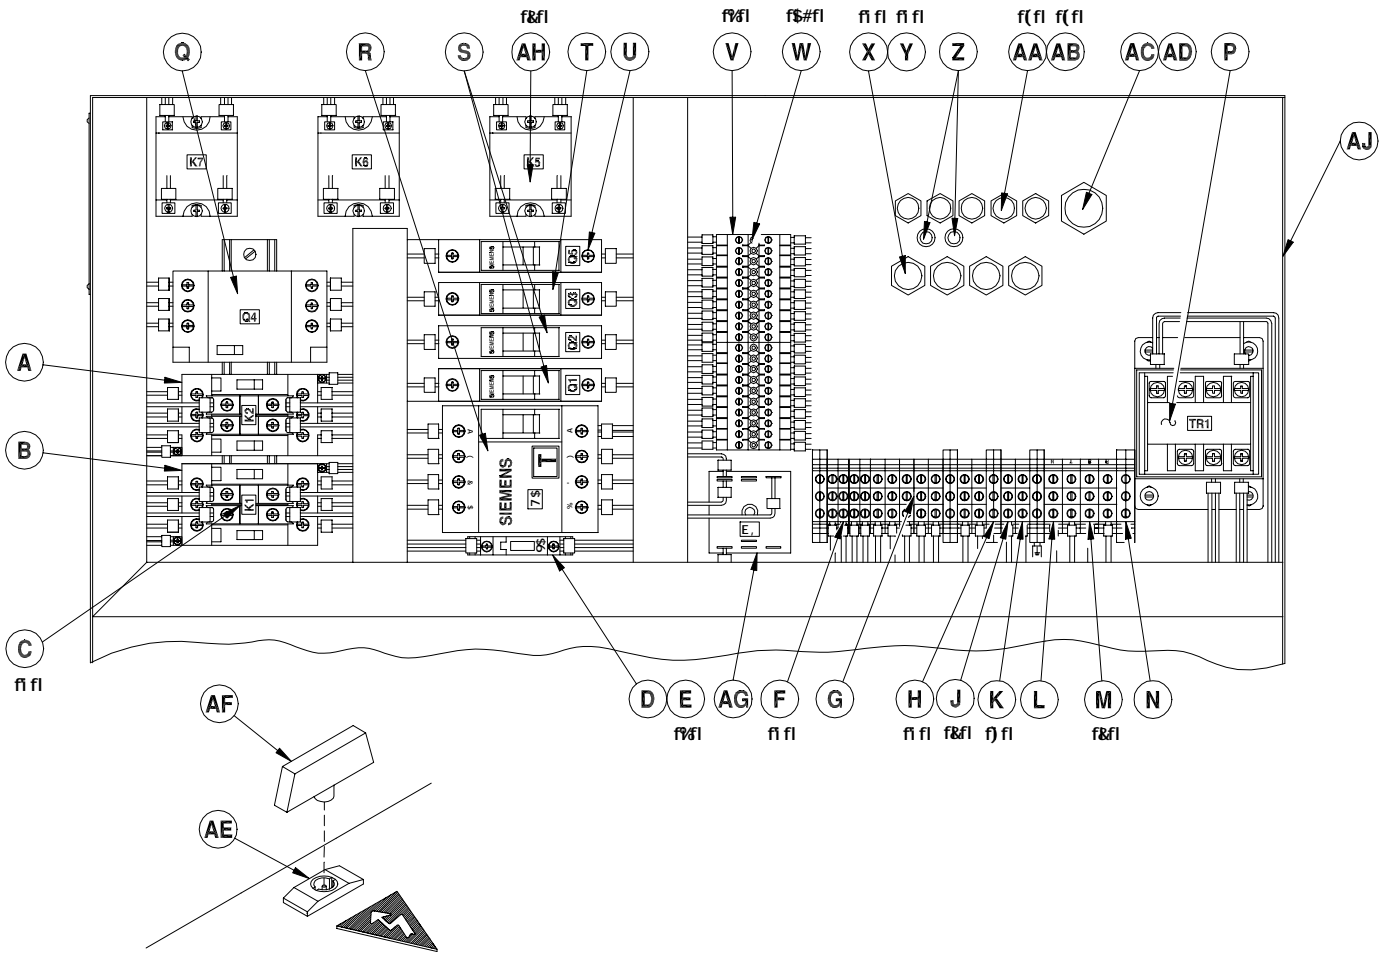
Electrical Console (Part No. 030-0006-001), Sheet 2 of 2
